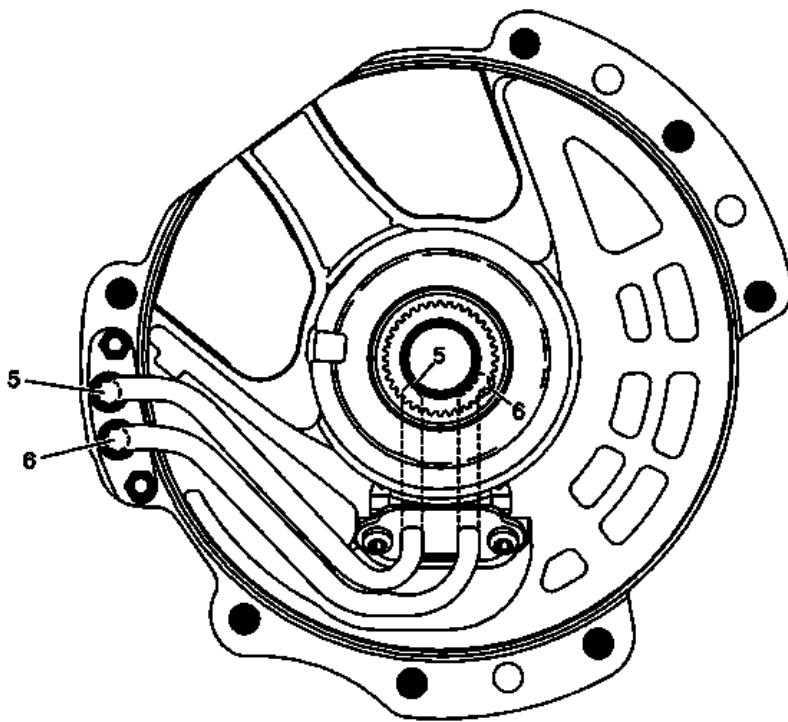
Identifying Front Differential Transfer Drive Gear Support Fluid Passages - Torque Converter & Differential Housing Side
